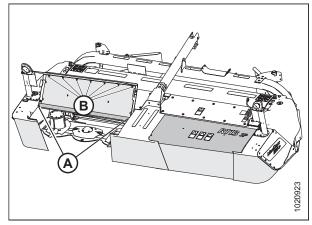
Cutterbar Door (Right Side Shown, Left Opposite)
